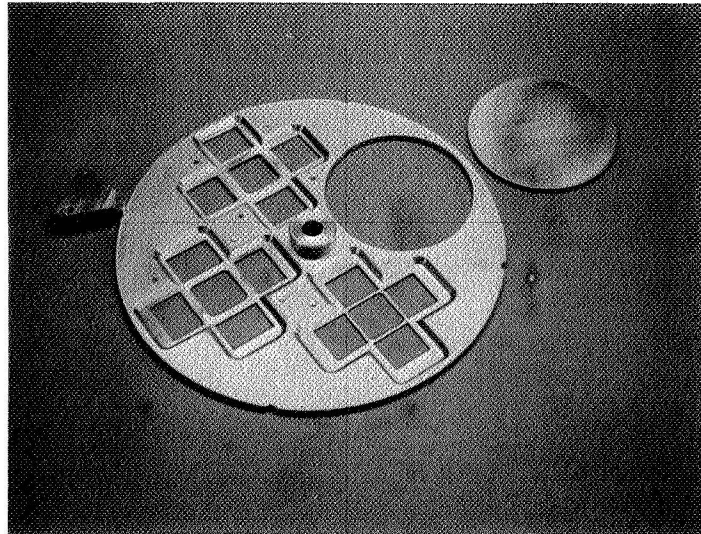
DETAILED VIEW OF MASK CHANGING DISK
